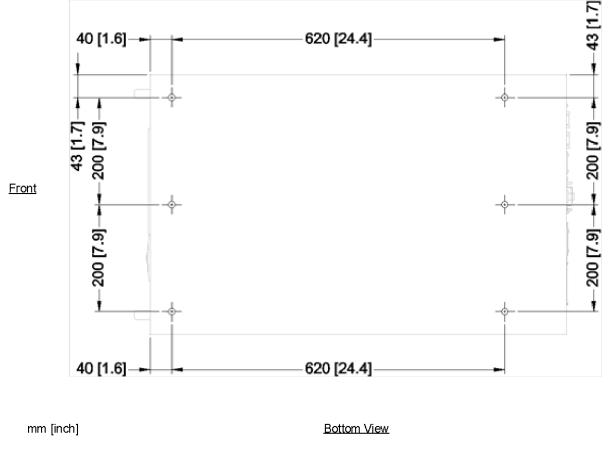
UPS Cabinet Floor Mounting Dimensions for Front- and Back-mounted
